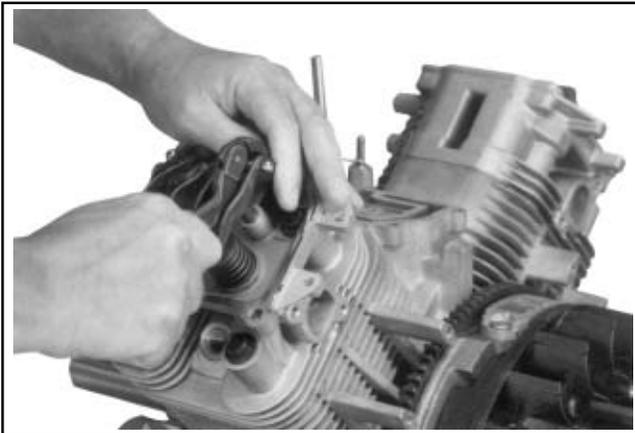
Using Spanner Wrench to Lift Rocker Arm Over Push Rod.
